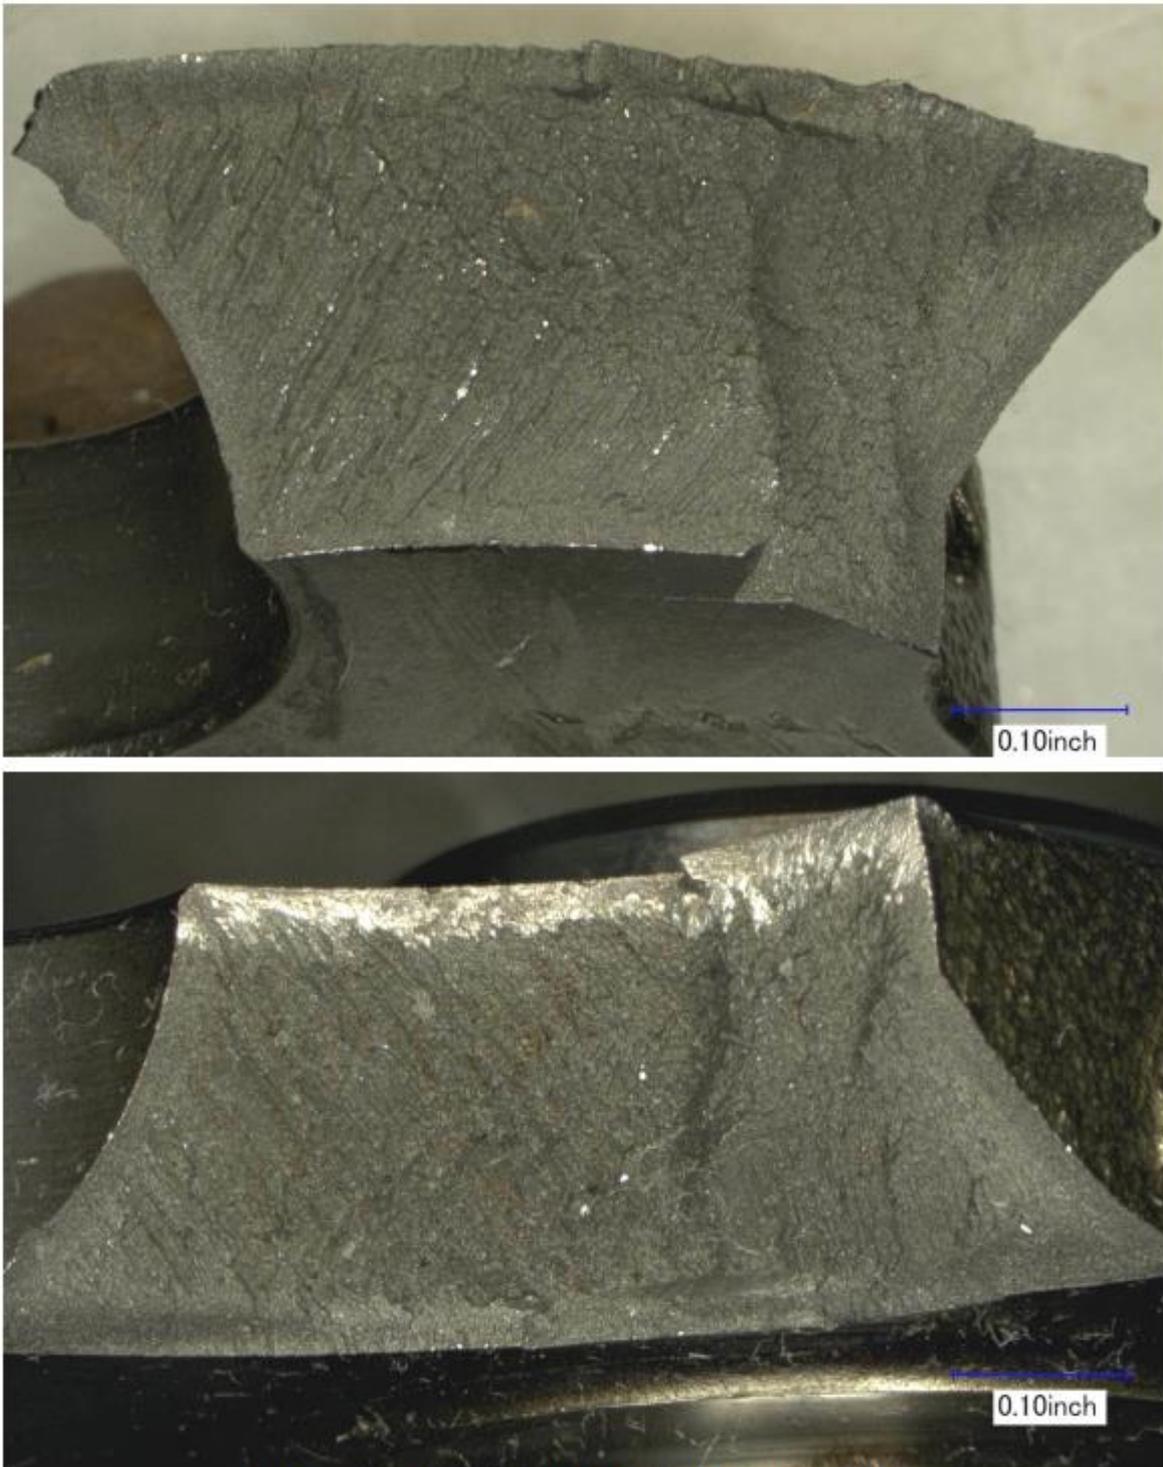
Right side of idler gear bolt hole fracture surfaces.
